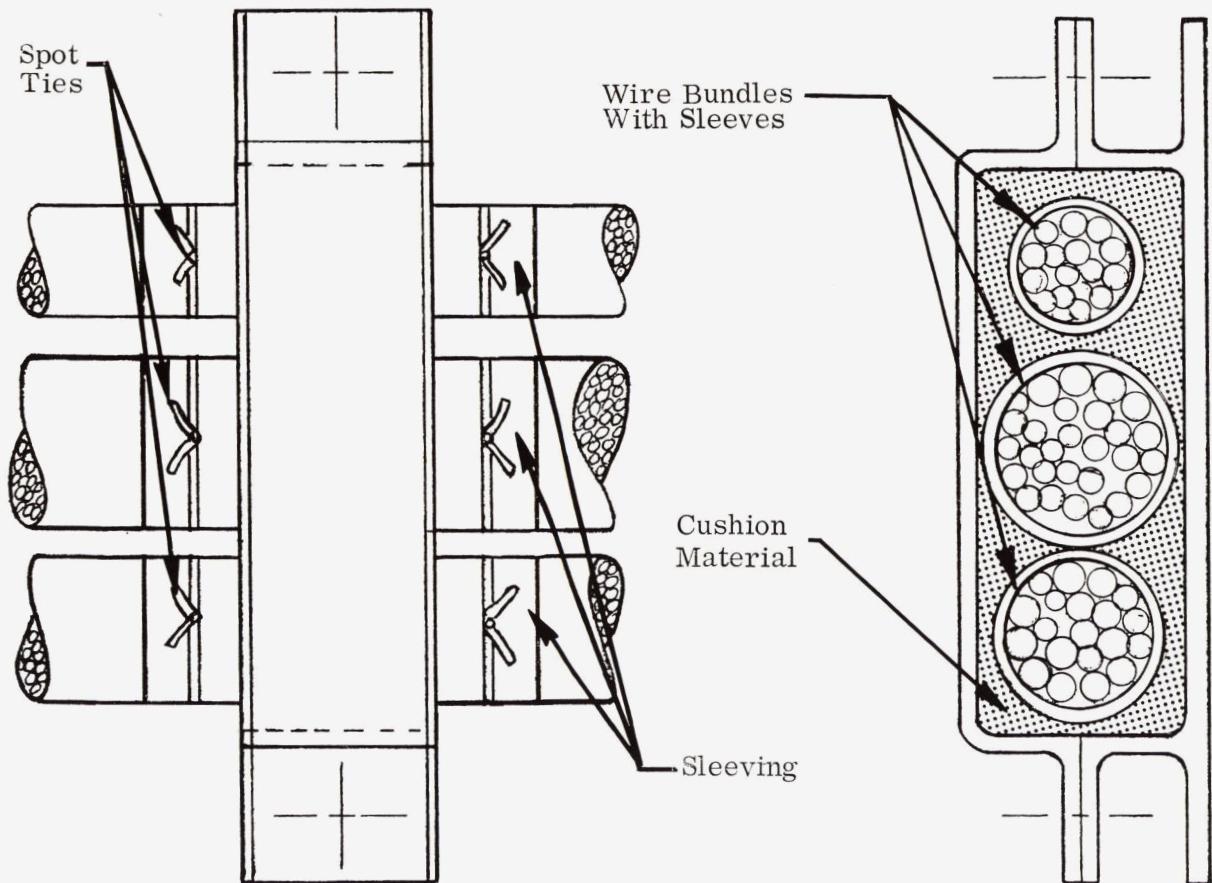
A Special Type of Clamp With Protective Cushion Filler Material
